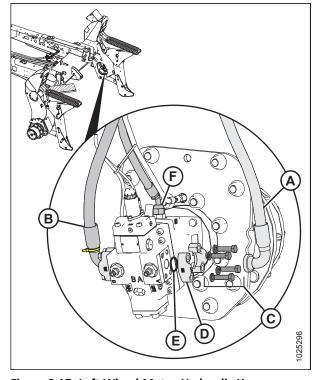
Left Wheel Motor Hydraulic Hoses
